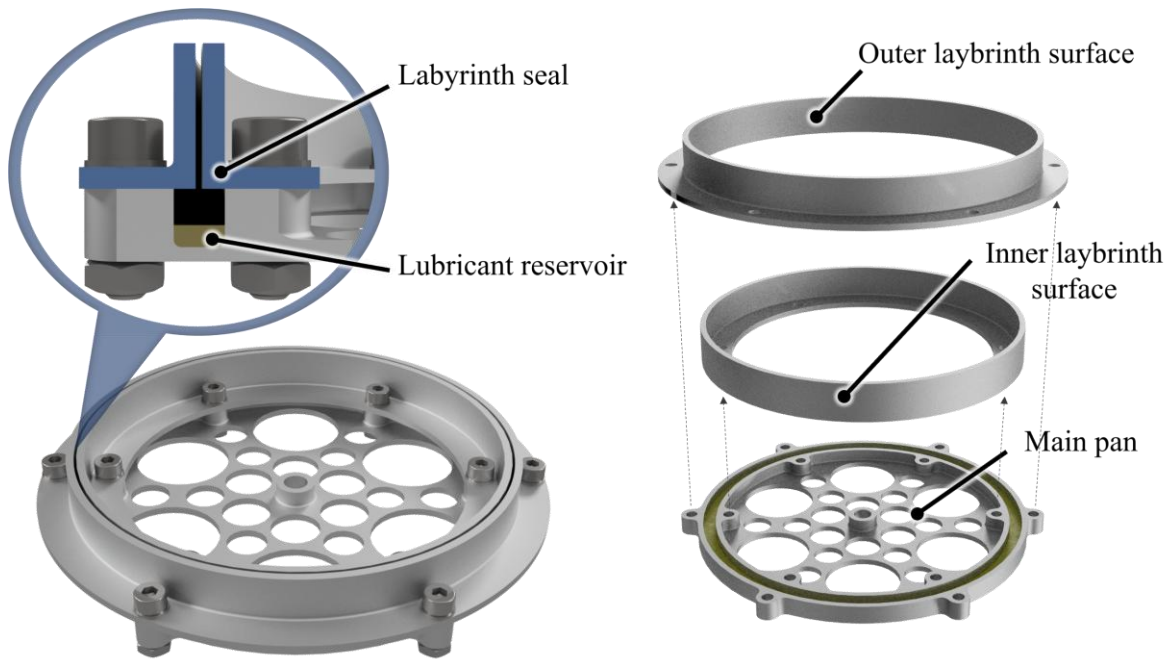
Labyrinth seal platform setup and assembly breakdown [2]
